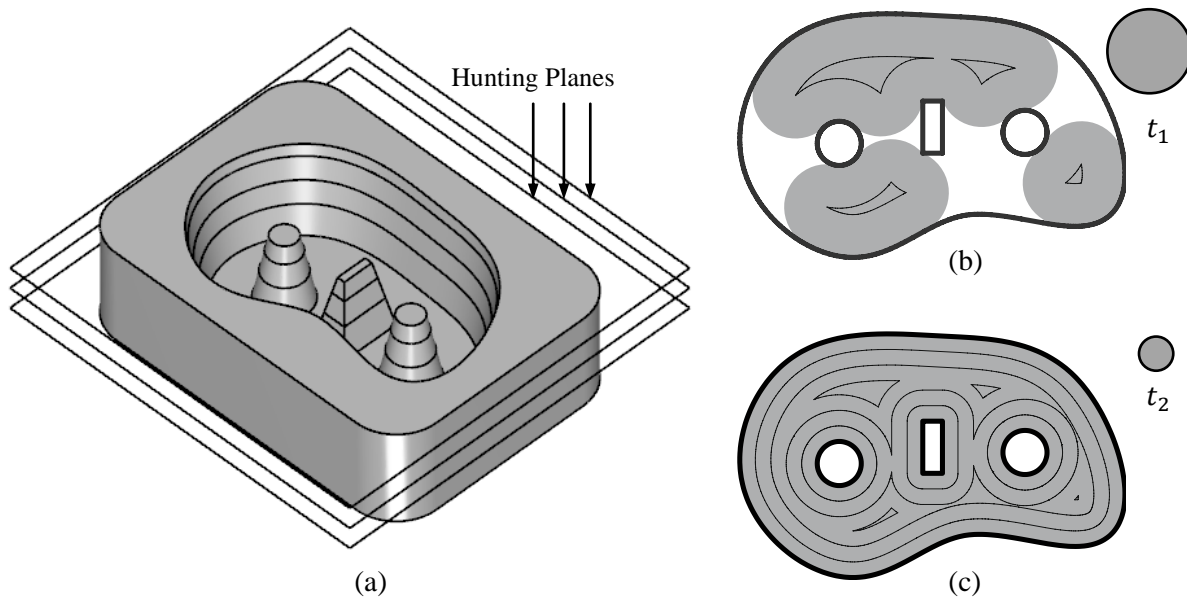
Free form cavity to be machined. (a) Hunting planes intersect part cavity surfaces to find part contours. (b) Accessible area (shaded) and tool path for large tool t_1 . (c) Accessible area (shaded) and tool path for small tool t_2 .
